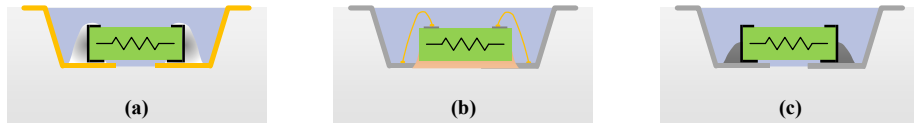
Cross sectional schematic of embedded passive device structure: (a) solderable pads with SMT device; (b) non-solderable pads with wire-bondable device; and (c) non-solderable pads with SMT device.
